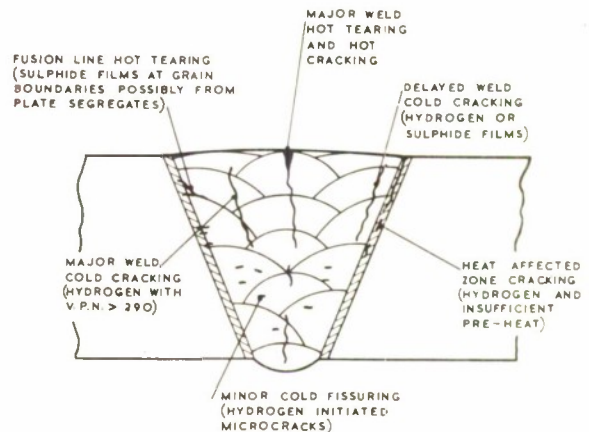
Forms of Cracking which may be Experienced in Weldments.
